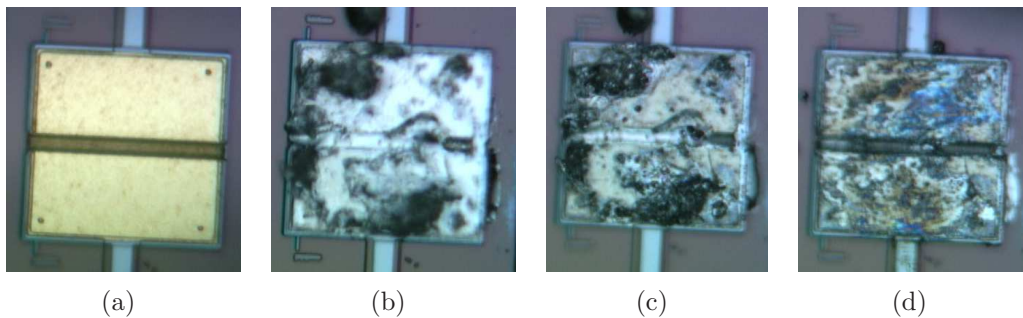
270  $^{\circ}\text{C}$  solder powder test: (a) original contact pad prior to application of solder, (b) solder covers contact pad after initial application, (c) five minutes after solder application the solder pulls in and creates pools of solder leaving gold on contact exposed, (d) reapplied solder removing the previous solder with no new solder adhering to pad surface
